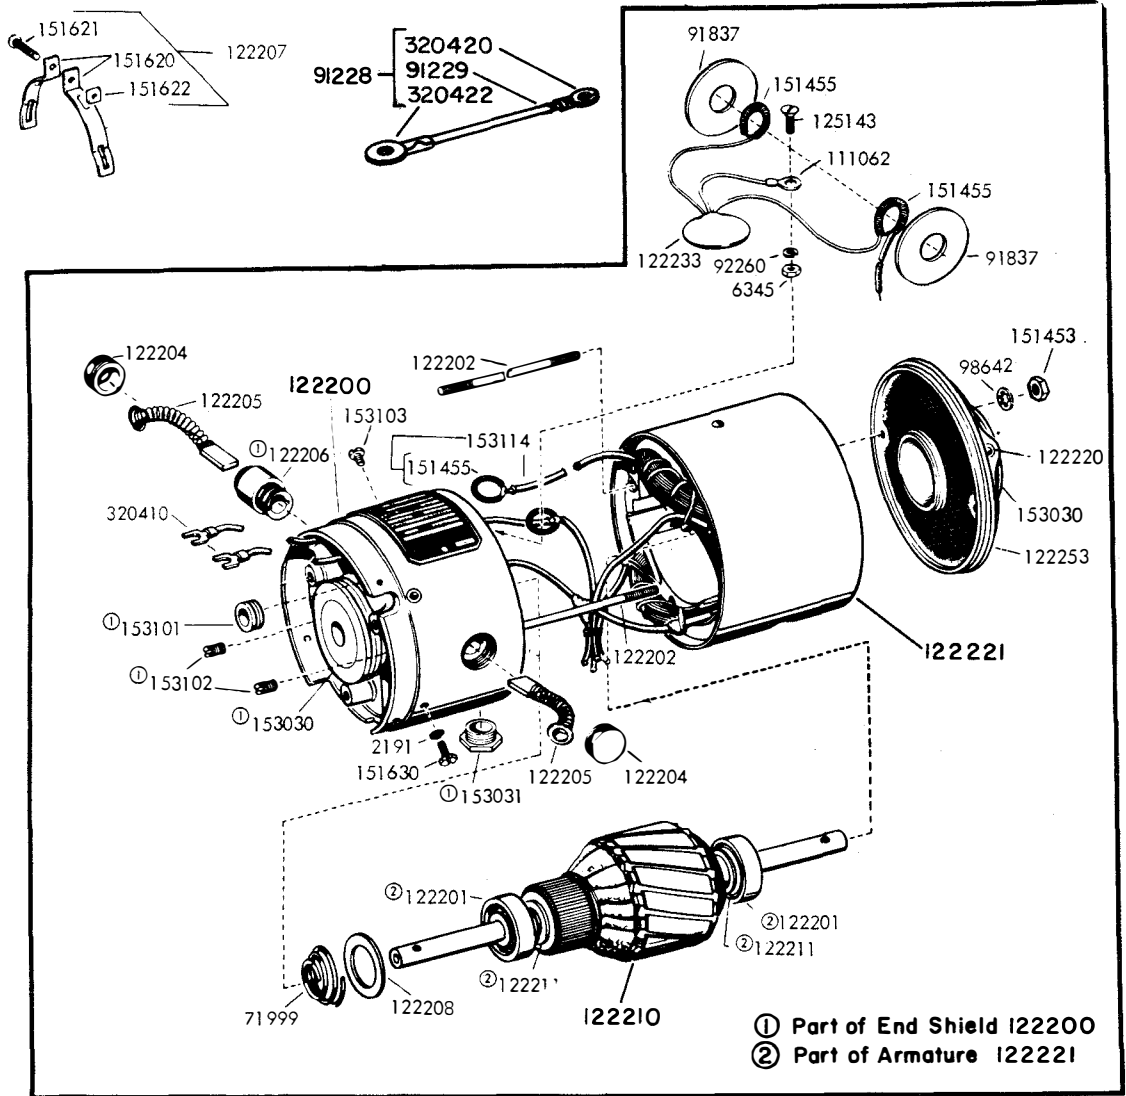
Series Motor Assembly 150701 (Standard) - Used on LMU41
